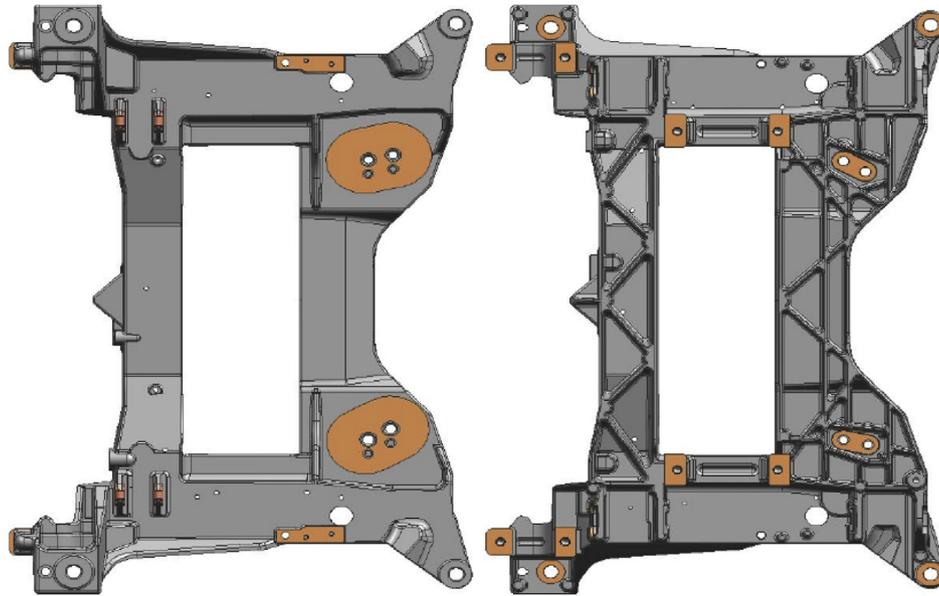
Aluminum isolator locations for Chevrolet Corvette Z06 magnesium cradle (bottom & top views) [50].
